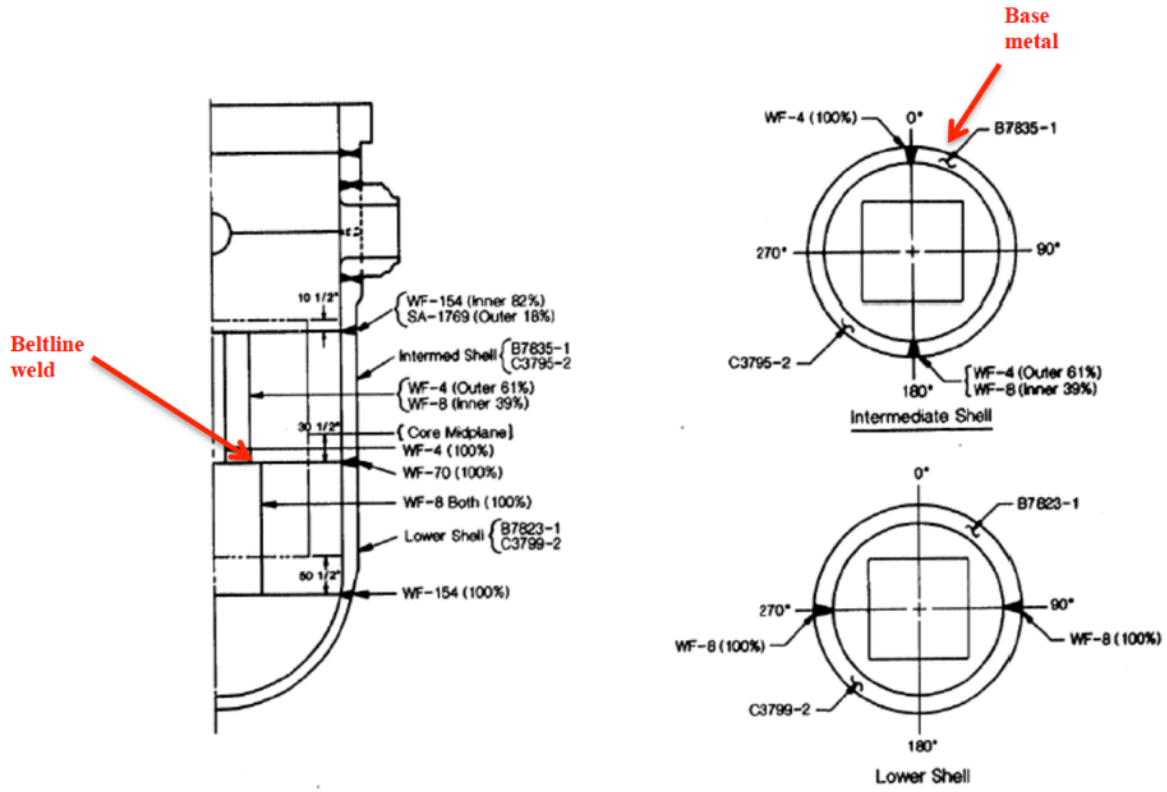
Location of materials (beltline weld W-70 and base metal, B7835-1) used in the fabrication of the Zion Unit 1 beltline (intermediate shell to lower shell), two vertical welds above the beltline, and base metal heats [17].
